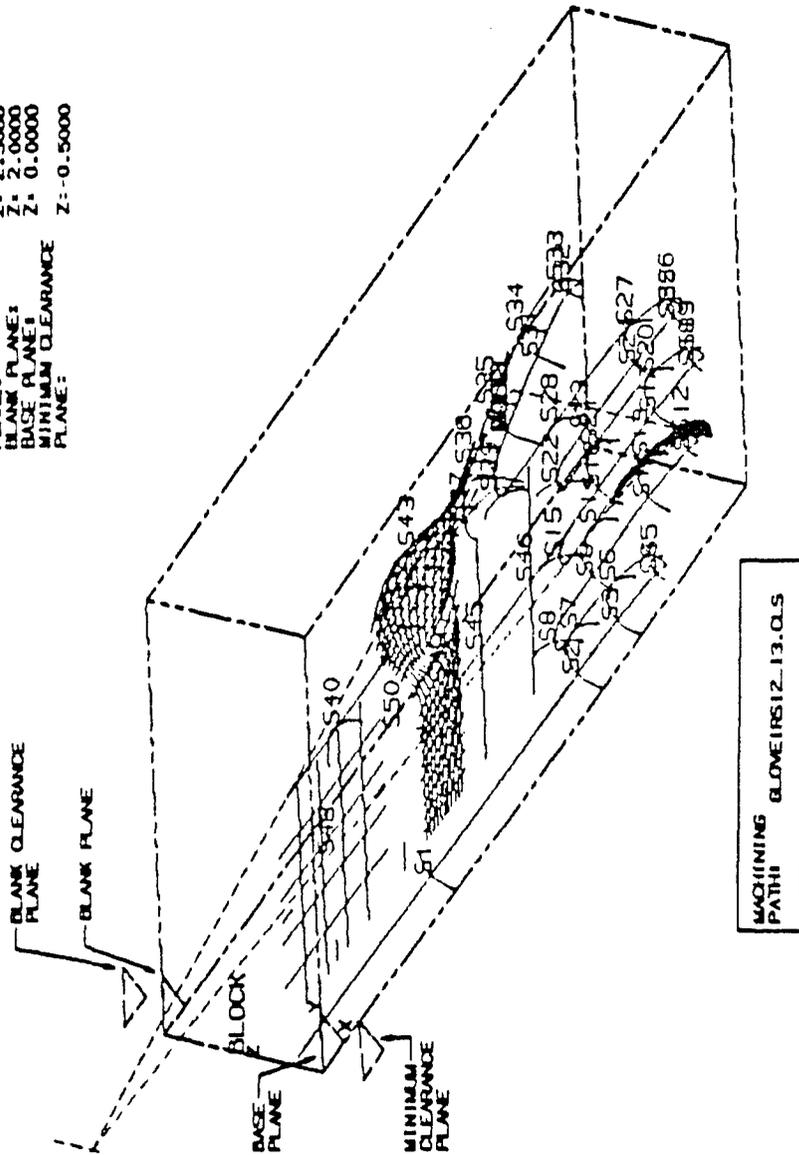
Machining Path: GLOVE1RS12\_13.CLS
